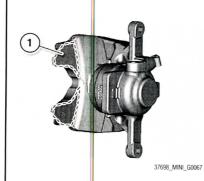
Clean contact surface of brake caliper with brake cleaner and apply a thin coating of brake pad paste
